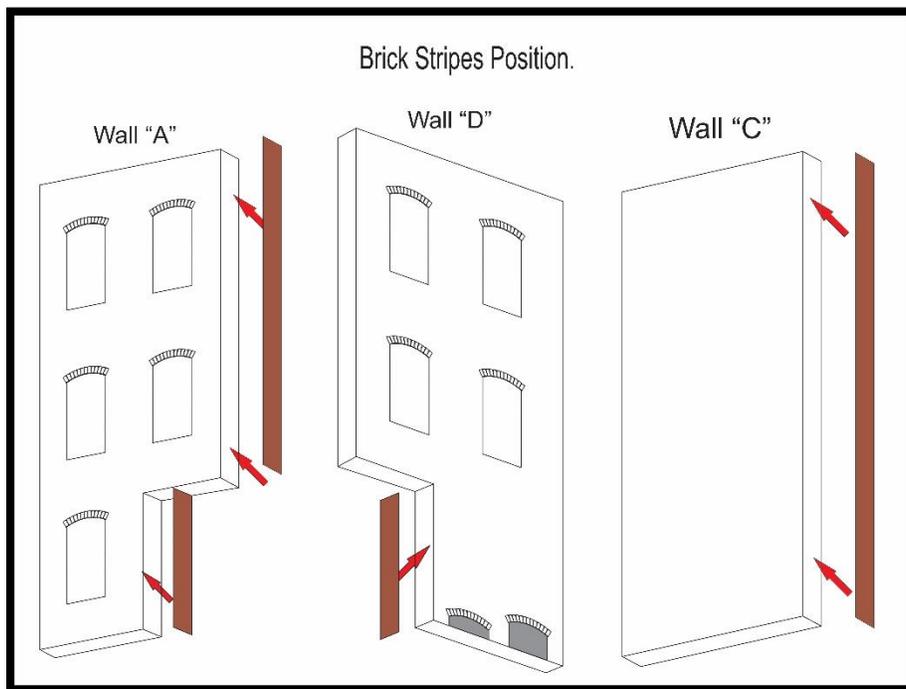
APPLYING BRICK PATTERN STRIP
